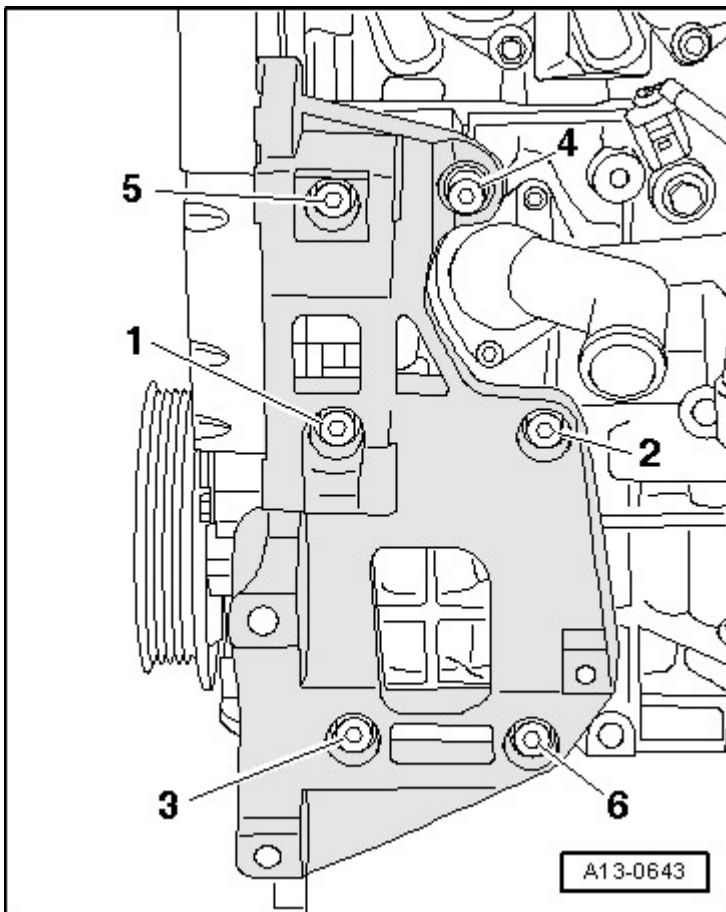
Removing/Installing Accessory Assembly Bracket Bolts
